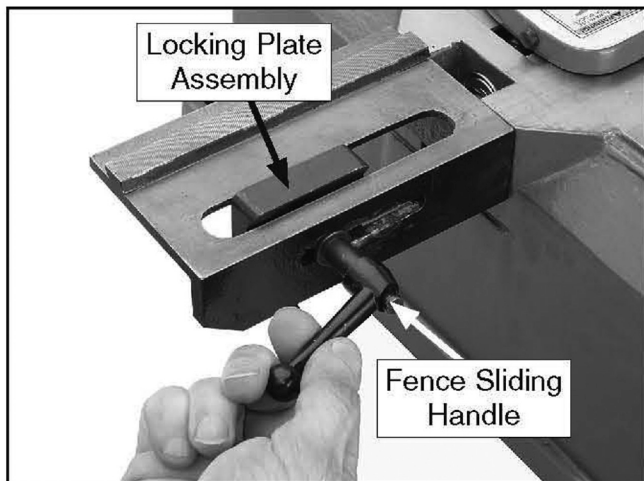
Securing the locking plate assembly with the fence sliding handle.
